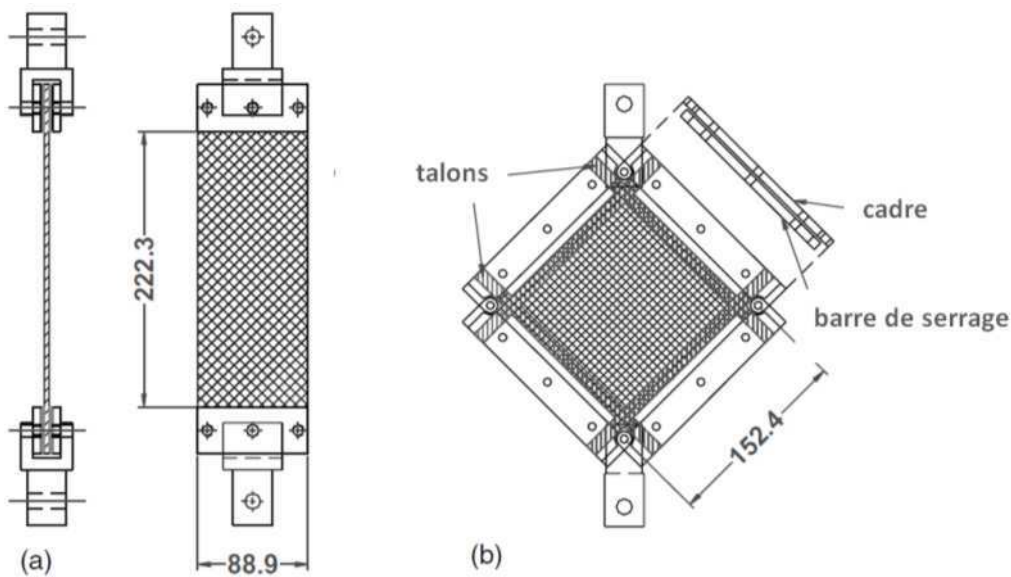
a) Bias Extension Test ; b) Picture Frame Test [66]
